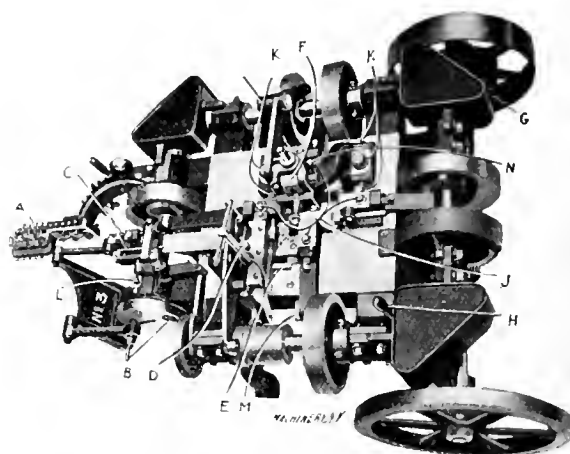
Top View of Machine, showing Mechanism and Adjustments.
